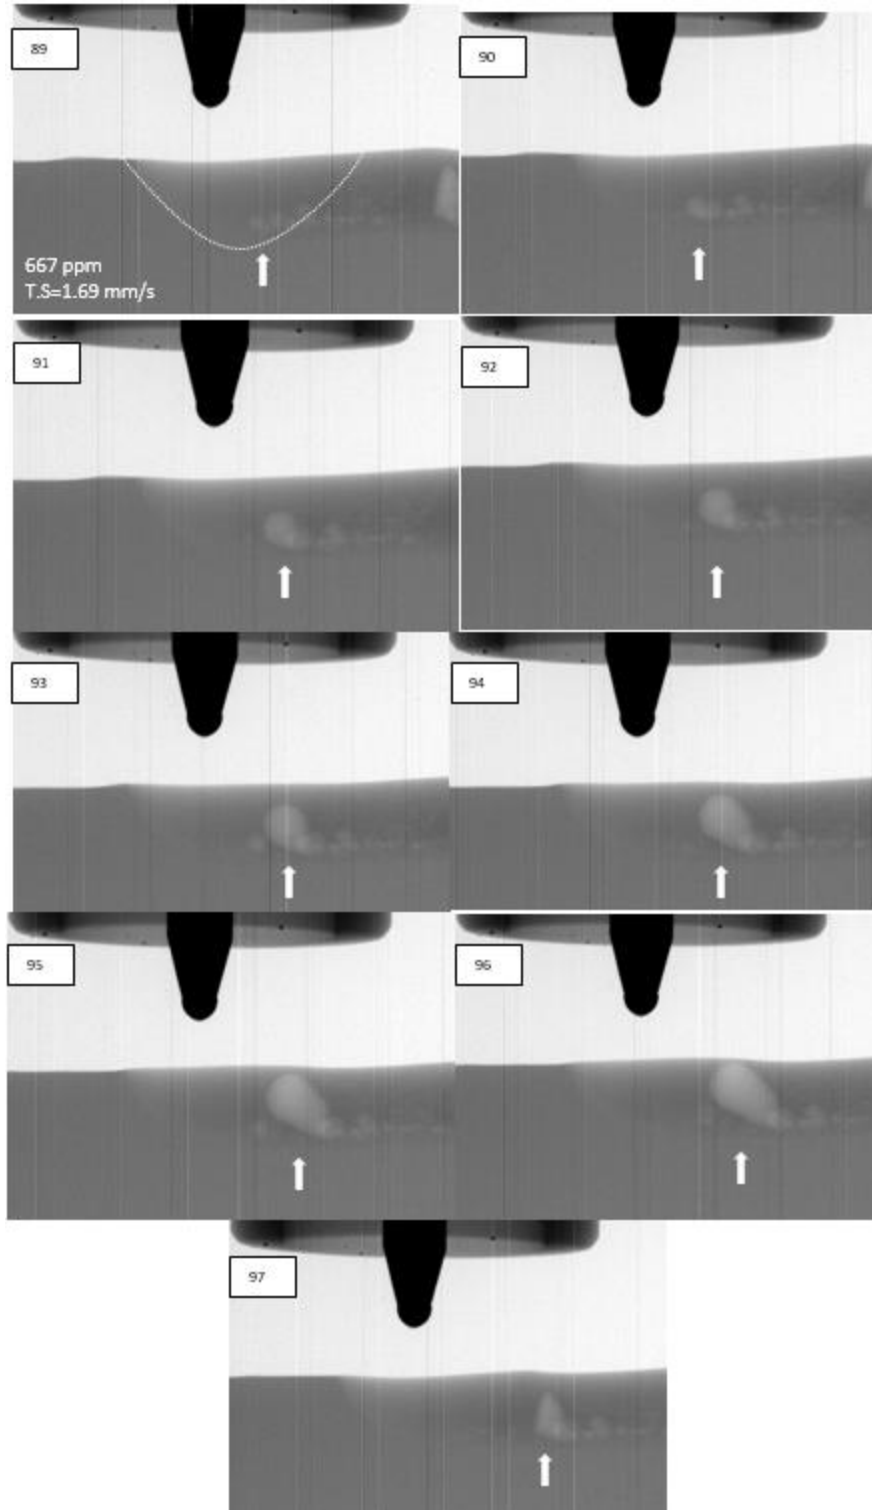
Alloy 1100 welded using 667 ppm of shielding gas hydrogen at 1.69 mm/s.
